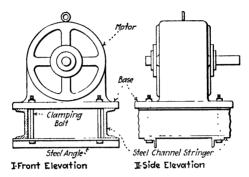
Method of fastening a motor to channel stringers with angle clamping bars.
